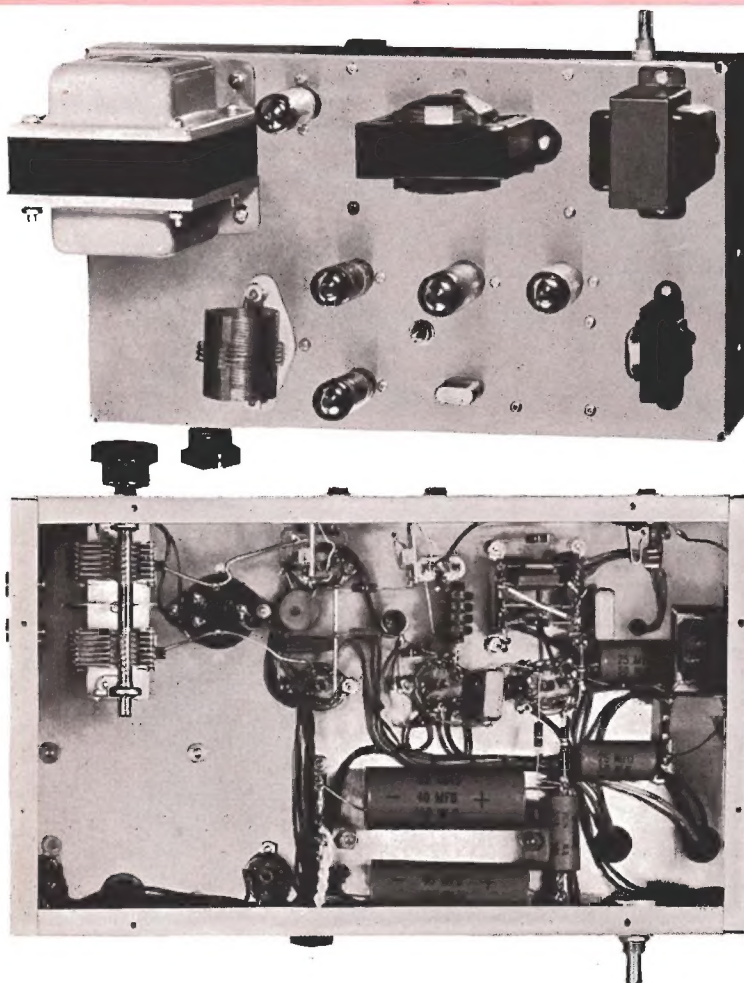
Top view of the double sideband transmitter, showing the locations of major parts on chassis deck. Check to see that sufficient space is provided for components which differ in size and shape from those listed. The audio filter inductor ( $L_2$ ) and the microphone transformer ( $T_3$ ) should be oriented in the positions shown to prevent inductive hum pickup from the power transformer ( $T_1$ ).
